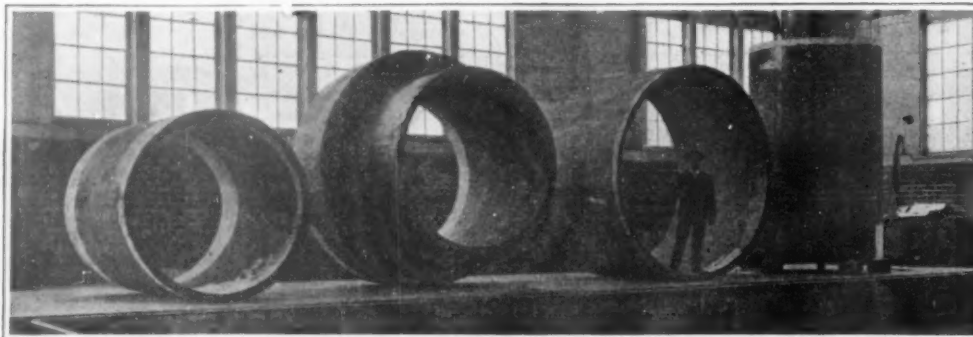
Marine parts made in France whose size and shape constituted a notable problem in forging technique
